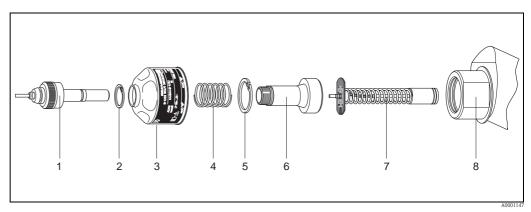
Flow measuring sensor W "Insertion": installation/removal
